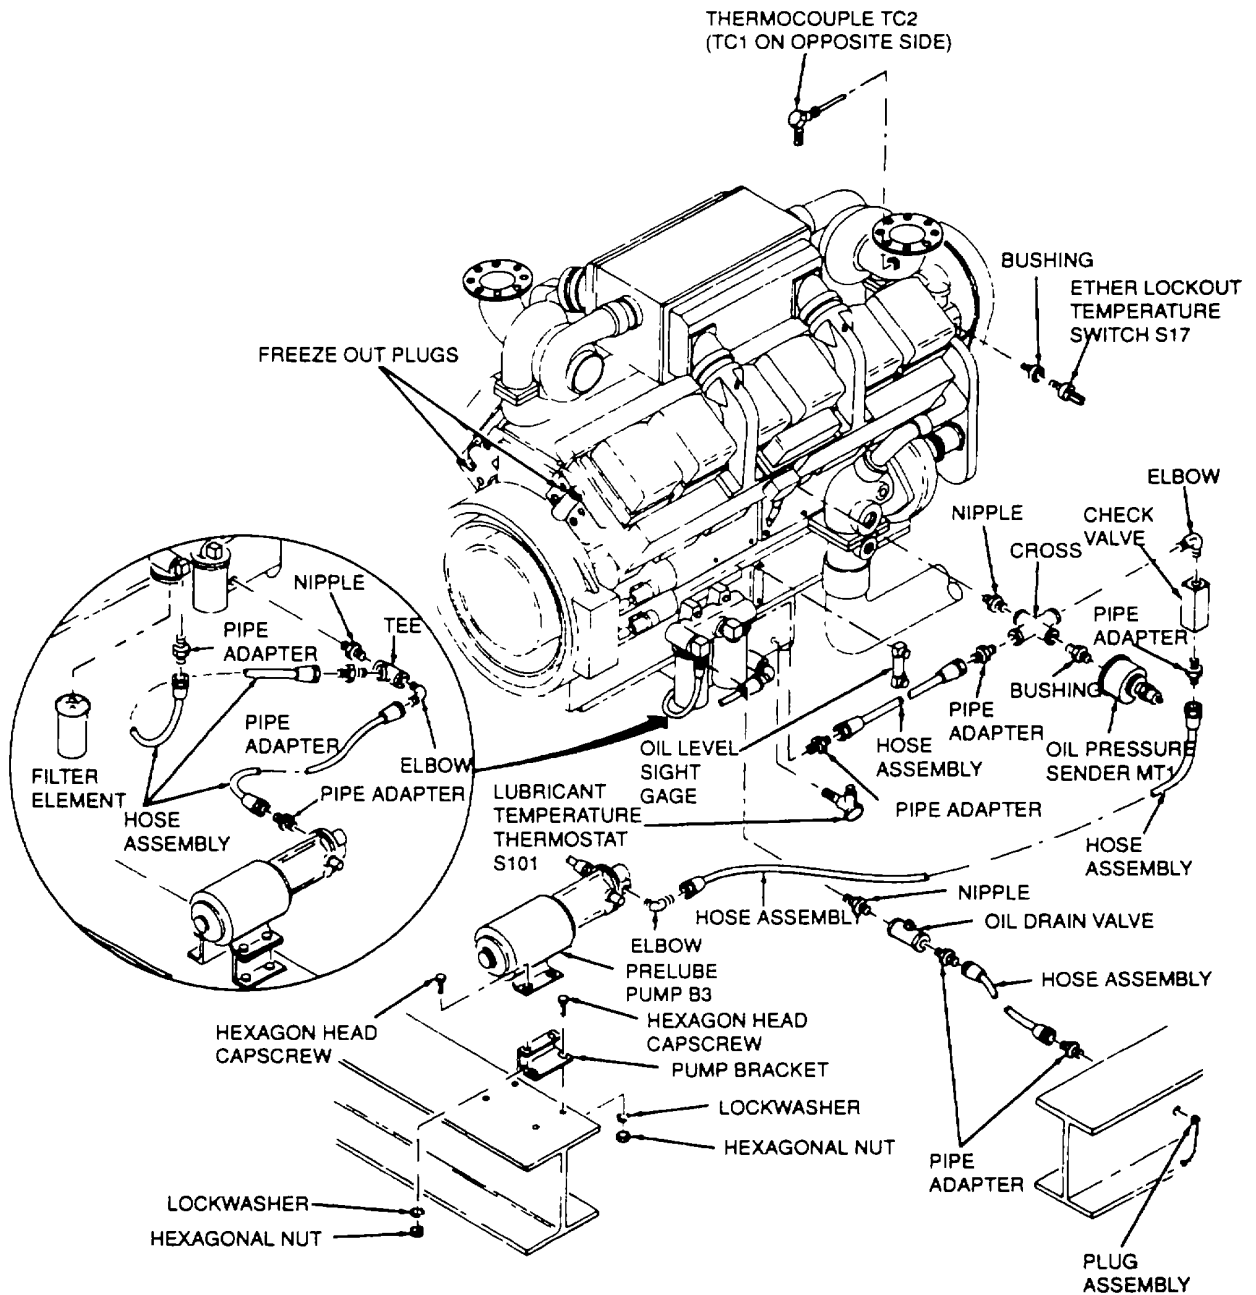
Engine and Related Parts (Sheet 4 of 5)
